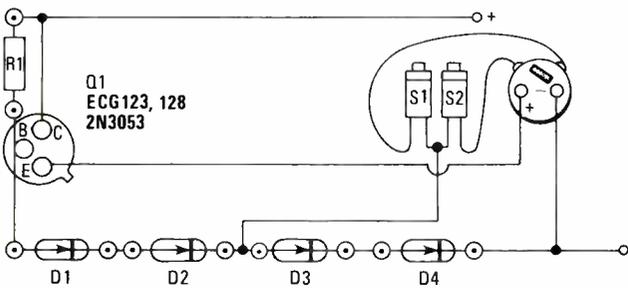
SUGGESTED PARTS LAYOUT for regulator circuit. As there is nothing critical about this circuit you are free to rearrange parts to suit yourself.
